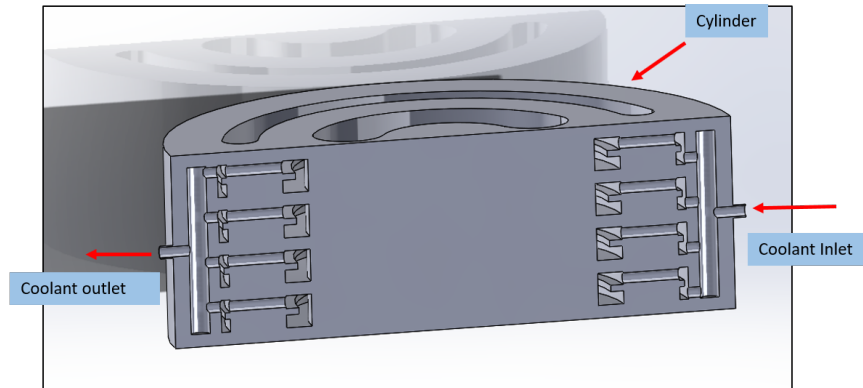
Section view of cylinder assembly in Design D with internal cooling path.
